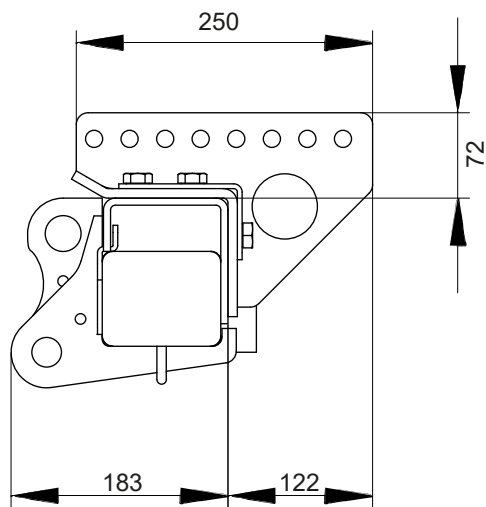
ZL-45-90, ZL-45-110, ZL-75-90, ZL-75-110
